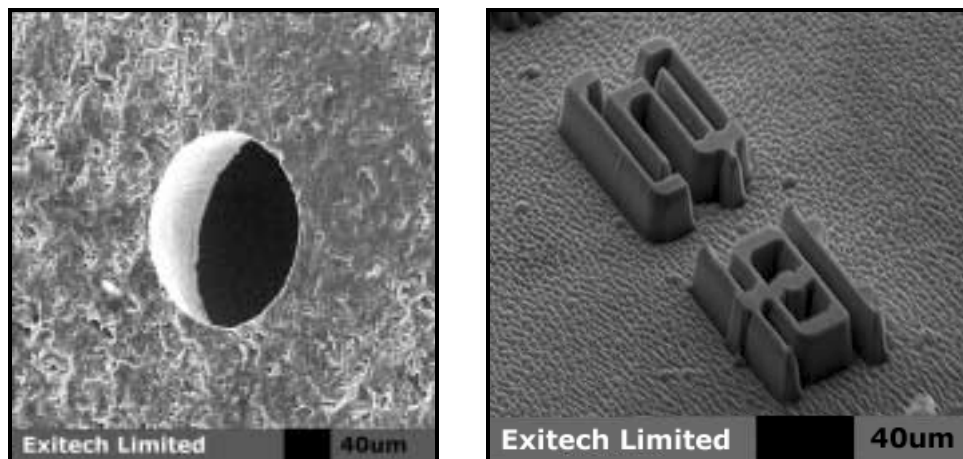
Examples of micro-structures produced with static mask projection method showing a hole drilled into ceramic and some features machined into polymer.
